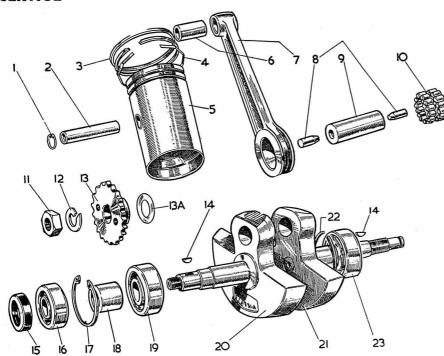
Exploded view of crankshaft, rod and piston assemblies on Mark 2L, 9E, 31C, 31A, 32A, 33A and 34A.
